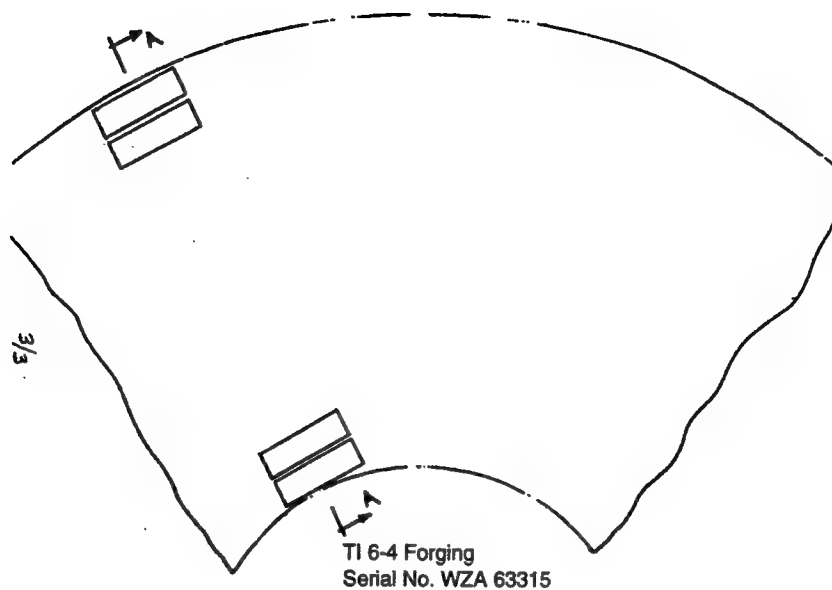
Ti-6-4 SPECIMEN CUTUP PLAN (TOP VIEW)
